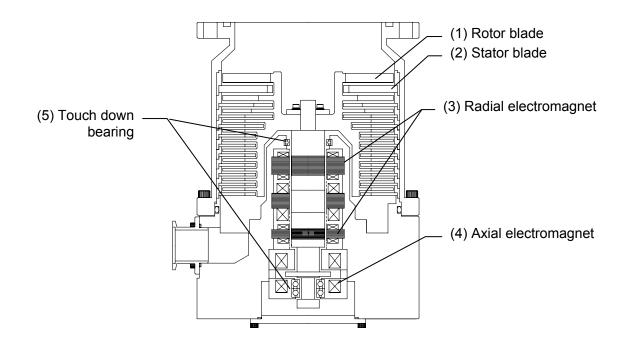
shows the cross sectional view of the STP pump. The STP pump is configured so that rotor blade (1) and stator blade (2) are aligned alternately in the axial direction. The rotor blade (1) is supported by the magnetic bearing without mechanical contact. Therefore, the STP pump requires no lubrication oil, unlike conventional turbomolecular pumps using ball bearings.
